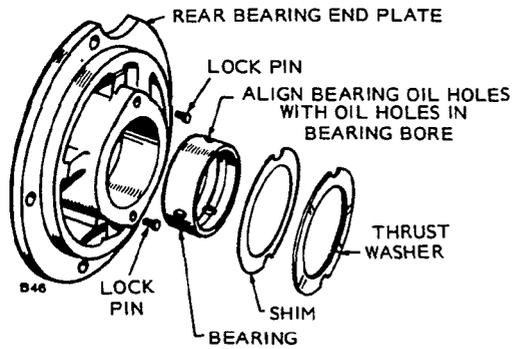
BEARINGS FOR REAR BEARING PLATE
